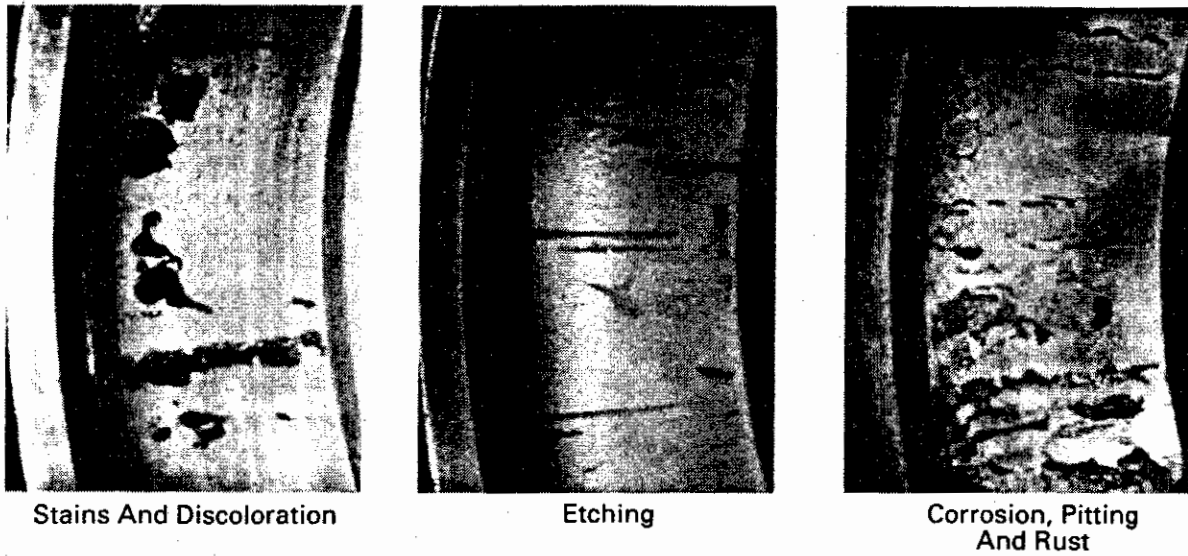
Stains, Etching, And Corrosion Pitting And Rust
